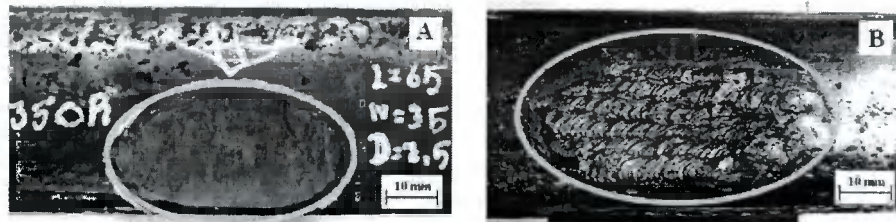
Surface welding repair of 70 pound/yard railway
